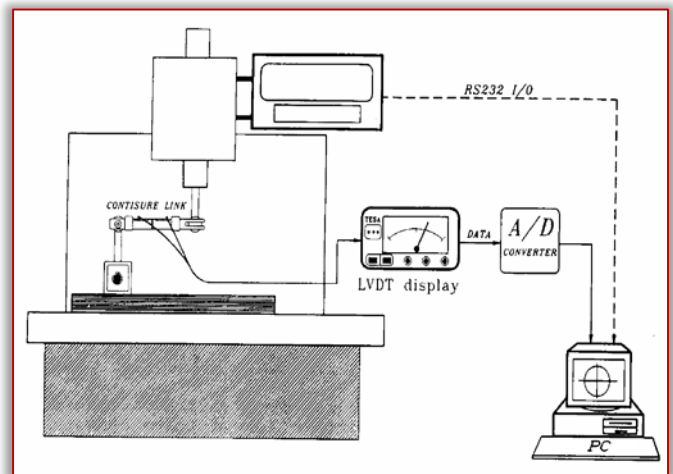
CONTISURE Double Ball Bar (DBB) system hardware set-up on CNC milling machine
